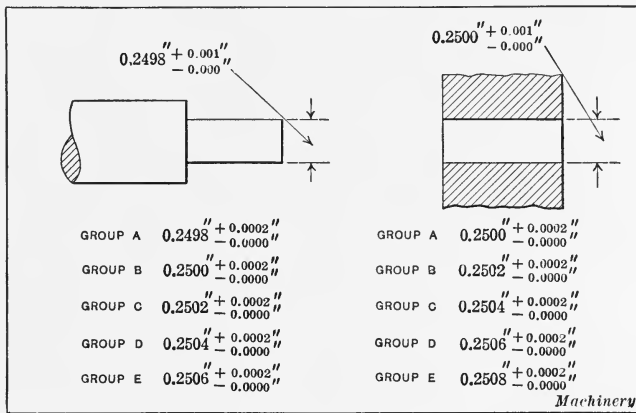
Information placed on Drawings used in Selective Assembly Manufacturing to facilitate the Grading of Parts
